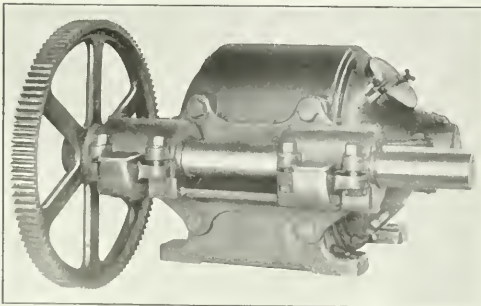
MOTOR WITH BACK-GEAR BRACKET
